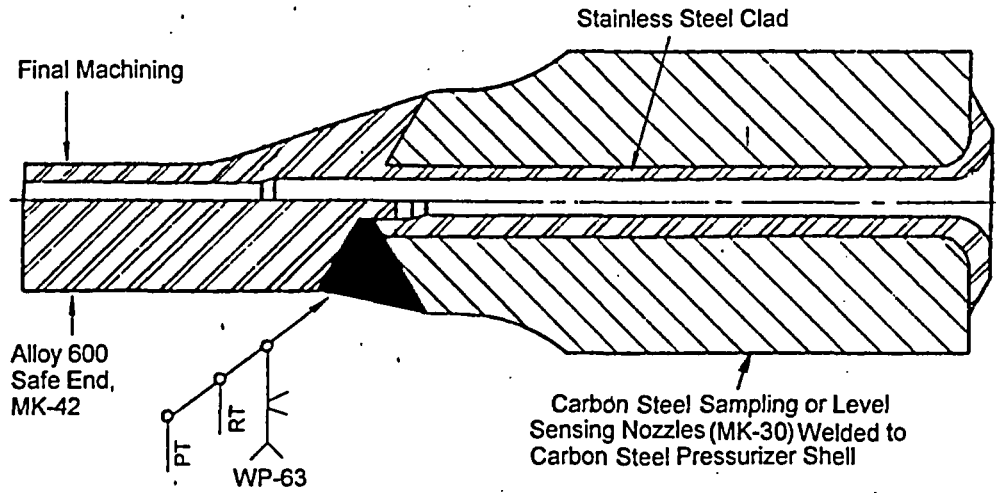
Detail of the 1-inch level sensing nozzle or 1-inch sampling nozzle to Alloy 600 safe-end weld.
